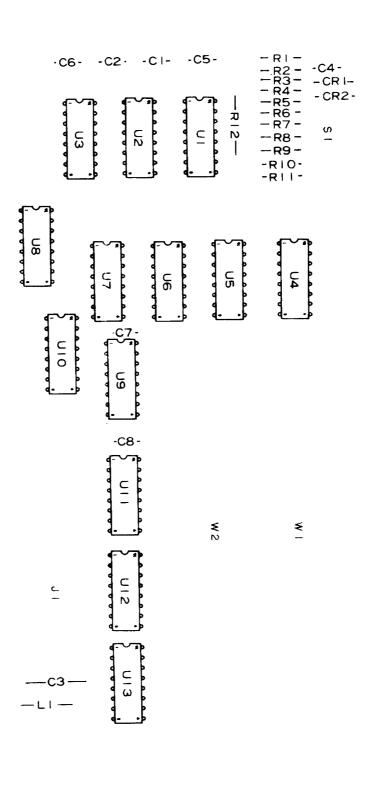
A35 BCD Output Control Board Assembly Component Locations.
